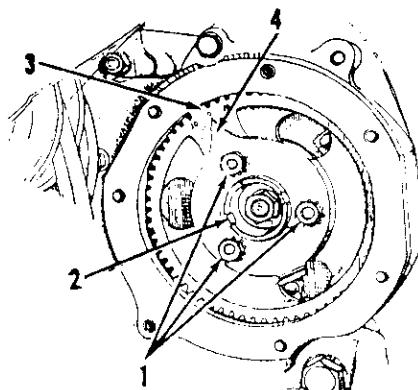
Injection pump drive gear used on early B-275 tractors equipped with injection pump having pneumatic governor.
